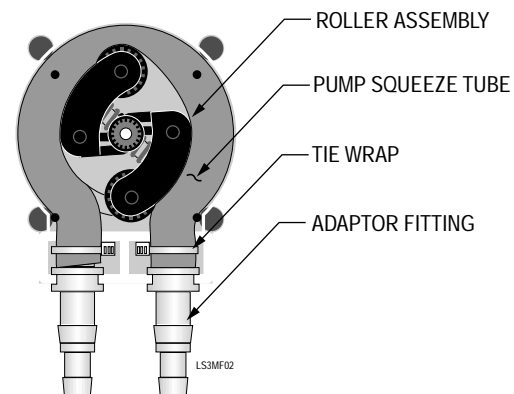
Replacing 600 Series SnapHead Pump Squeeze Tubing Assembly
